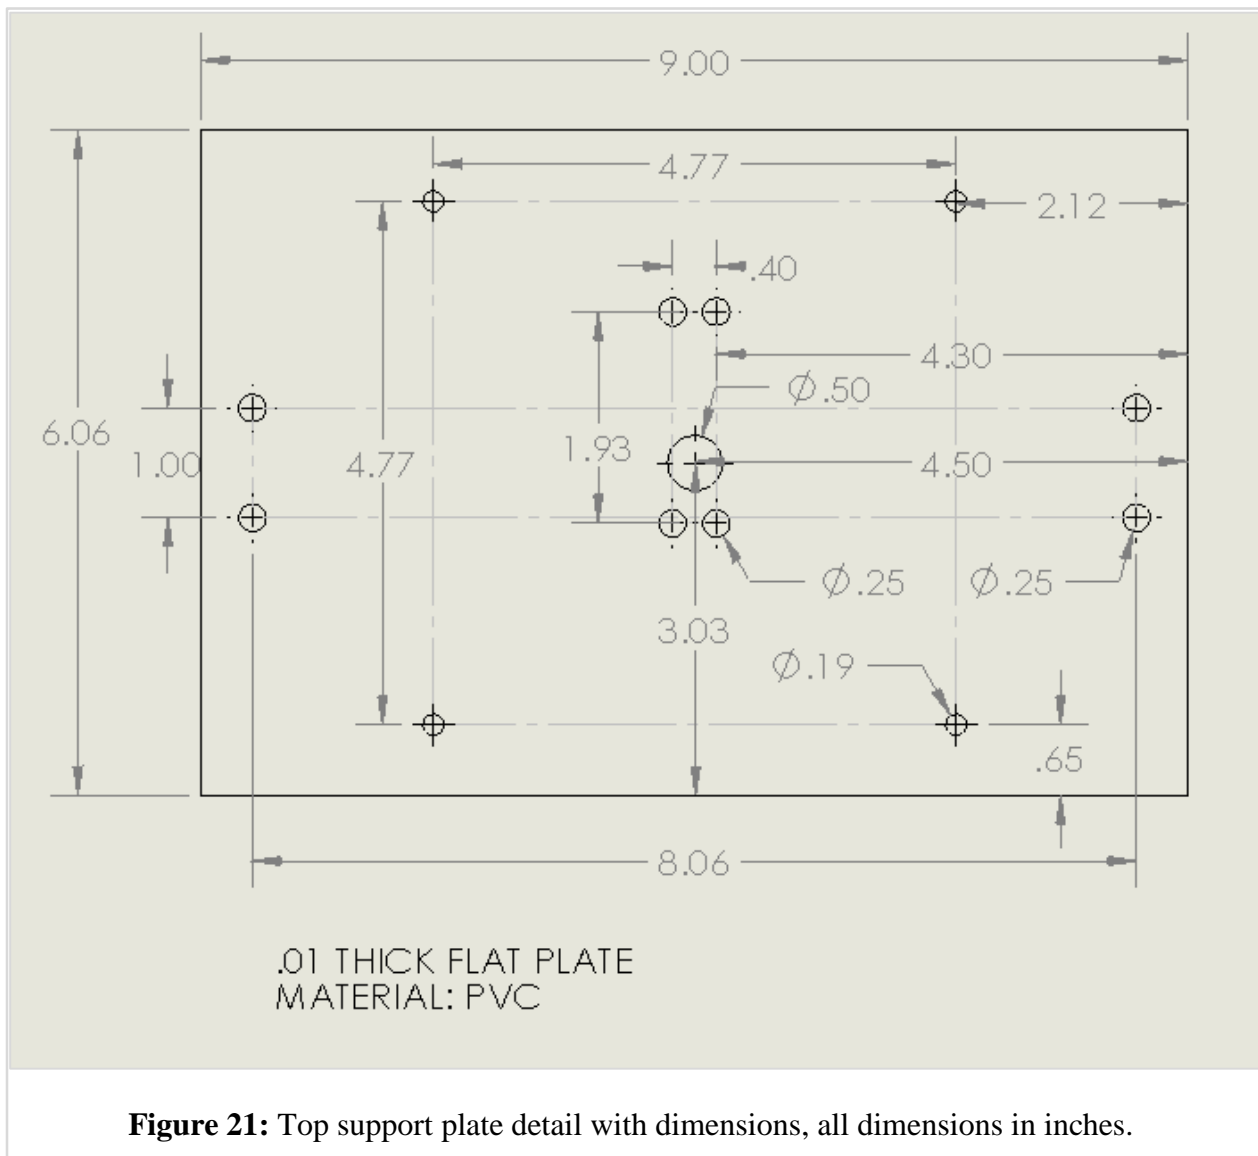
Top support plate detail with dimensions, all dimensions in inches.
